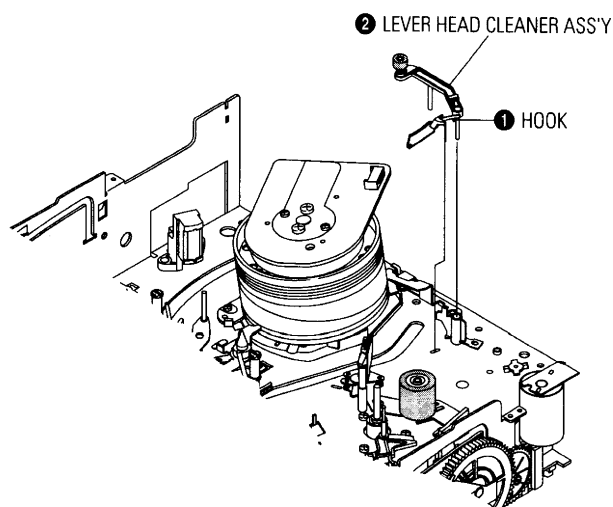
Lever Head Cleaner Ass'y Removal
